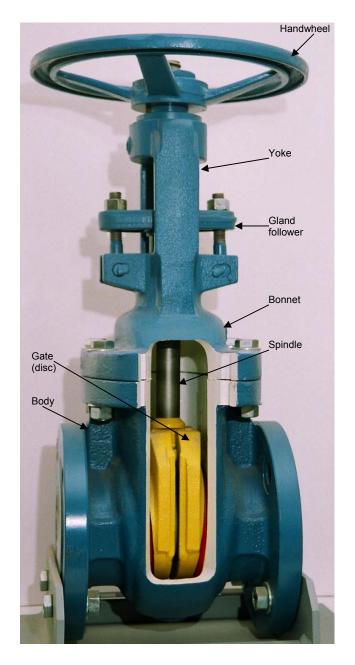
Cutaway Rising-stem, Flexible-wedge Gate Valve
